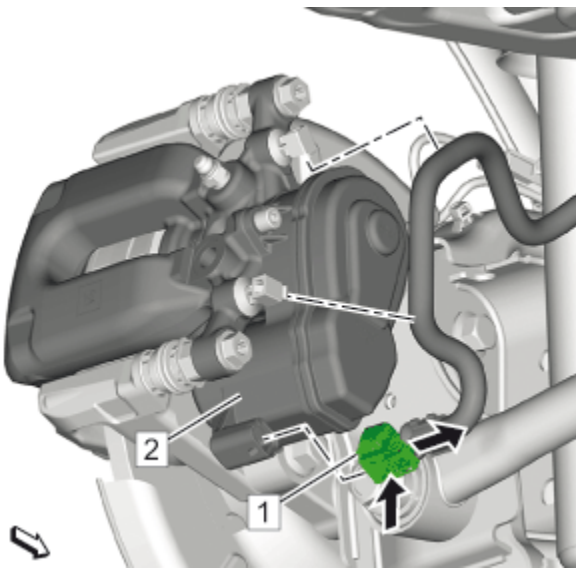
Brake Caliper Assembly And Lectrical Connector
